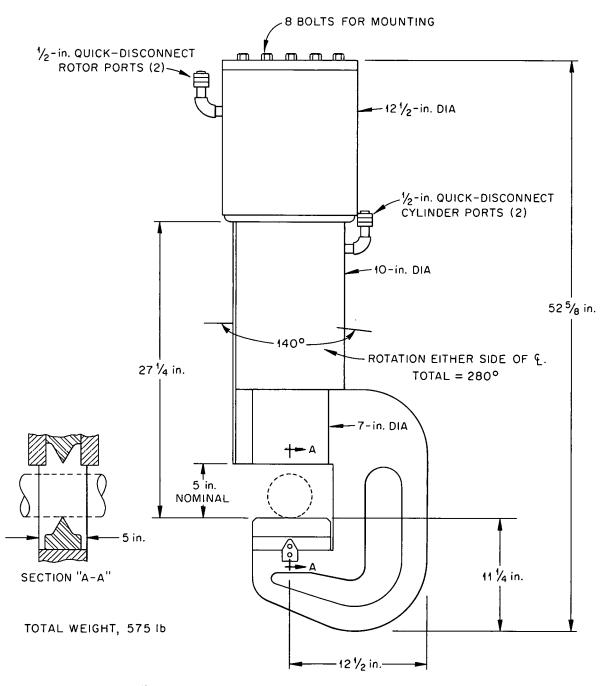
Schematic Drawing of the MC-125-DA Shear.
